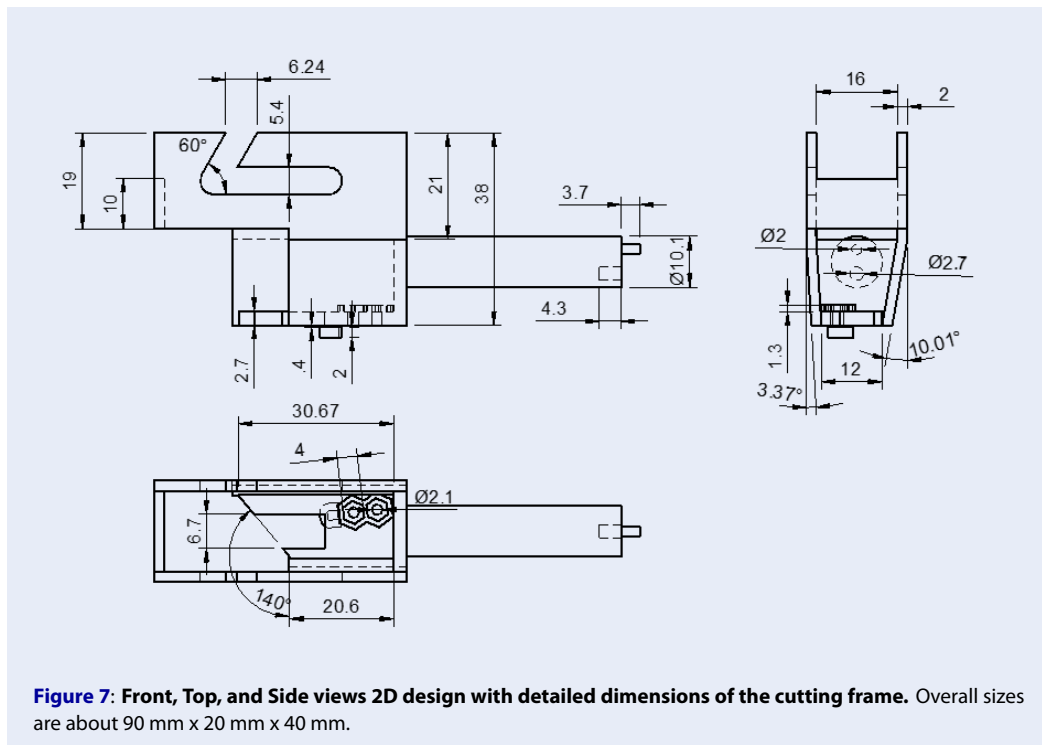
Front, Top, and Side views 2D design with detailed dimensions of the cutting frame. Overall sizes are about 90 mm x 20 mm x 40 mm.
